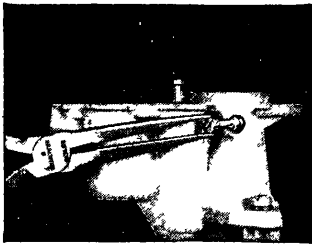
Install pump jet and pump jet rivet plug. Be sure jet is clear of all restrictions and seats properly
